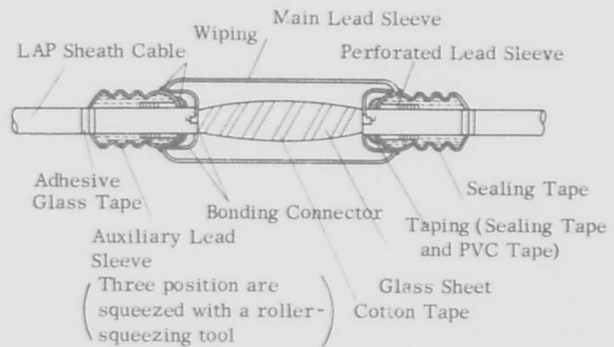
The improved auxiliary lead sleeve squeezing method using a roller squeezing tool
